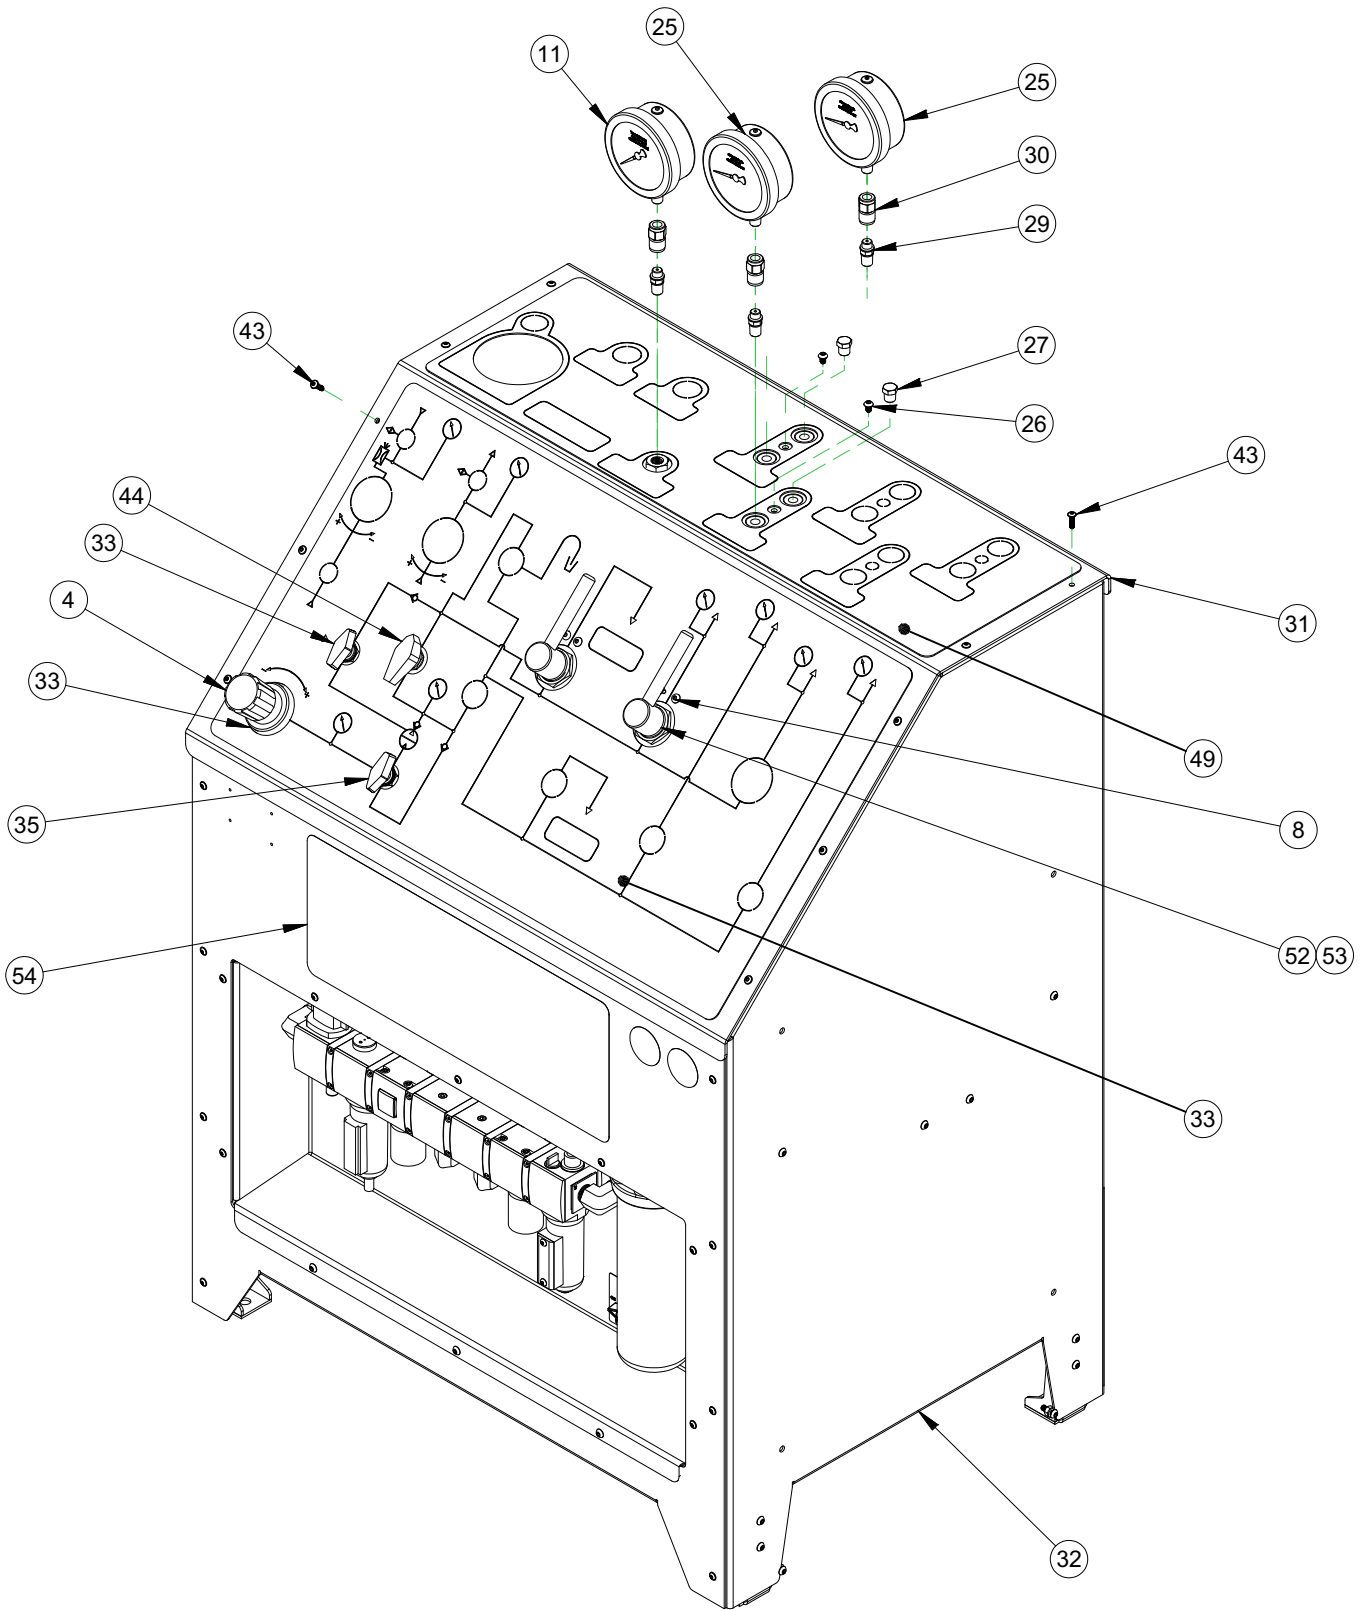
HPC-6K BASE ASSEMBLY (P/N 87174)
